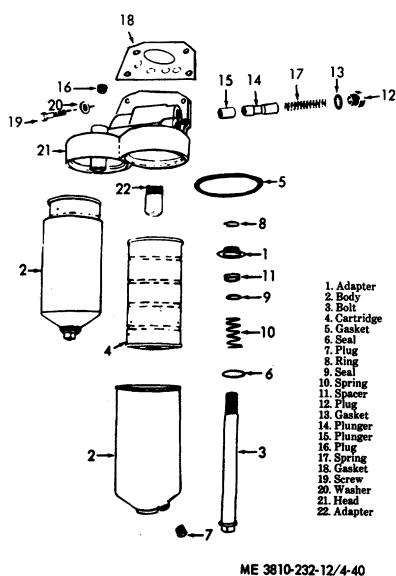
Crane engine oil filters, disassembly and reassembly.
